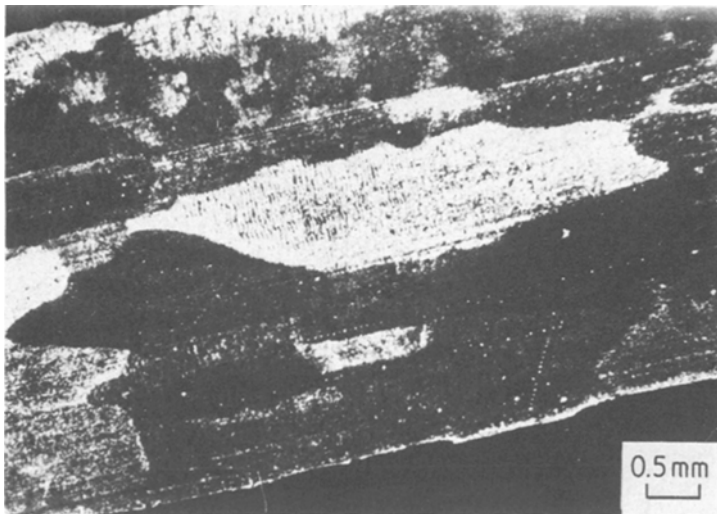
Machined surface of a coarse grained aluminium work-piece.
